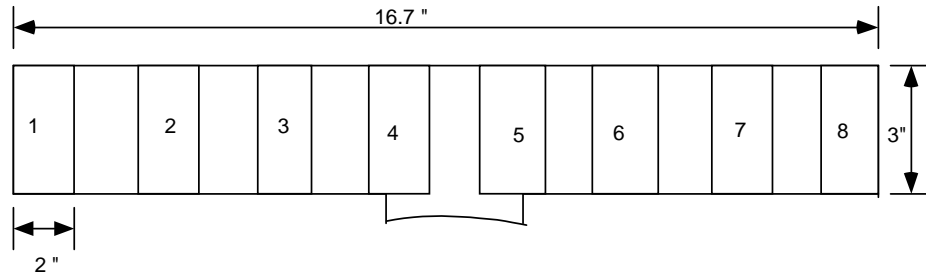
The Specimen Blank Location of Type D and Type E Specimens
